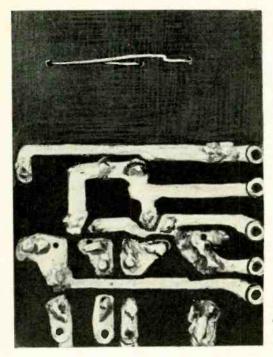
Rear view of Fig. 1 conductors made with silver conducting paint.
